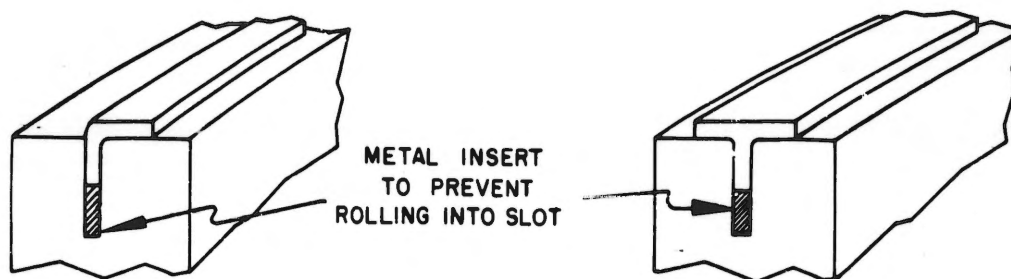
A Method of Reducing Radial Shrink in Stretch Forming
